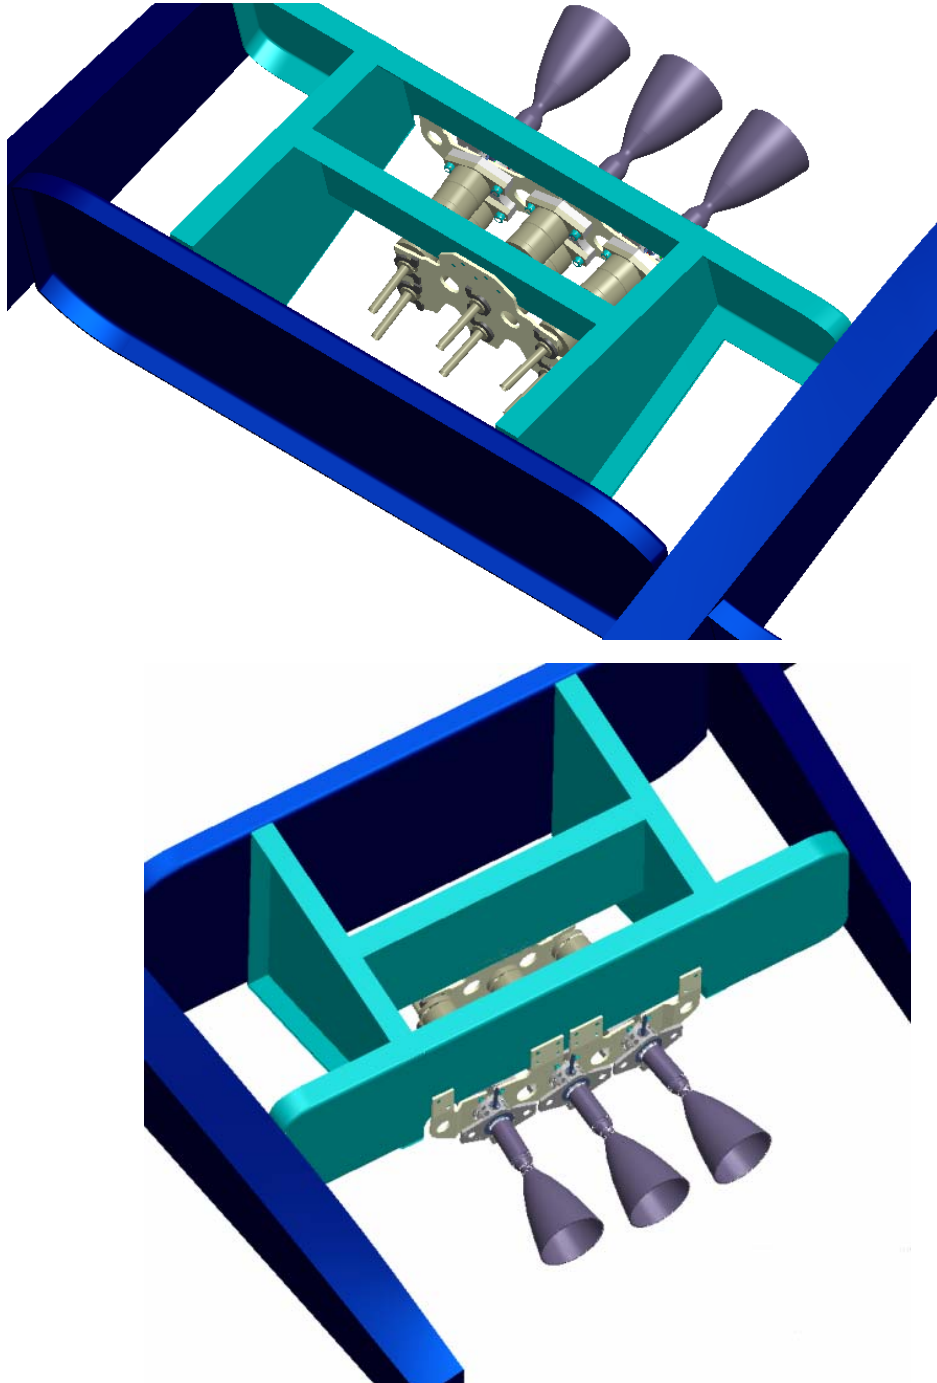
Triple 22N In-Line Thruster Assembly and Airframe Mounting Interface
